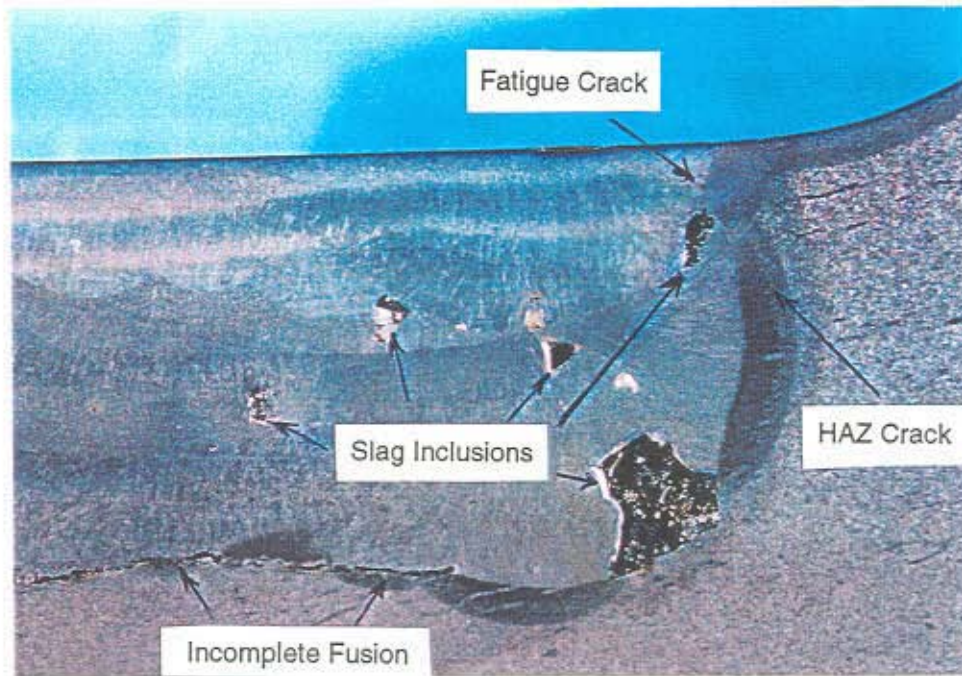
Enlarged View of the Weld Defects at the Termination of the Oilway Groove Weld Showing Slag Inclusions, Incomplete Fusion and Cracks.
